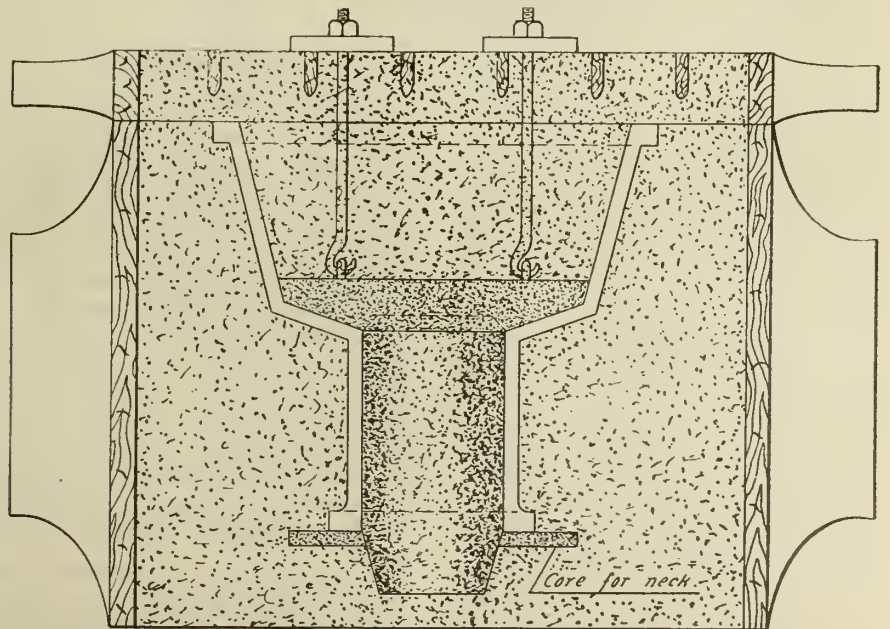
SHOWS BETTER WAY OF MOLDING. NECK CORE IS BEDDED IN AS THE MOLD IS BEING RAMMED UP. AFTER BEING BEDDED IT IS REMOVED, TEMPORARILY, AND THE FLANGE WITHDRAWN. THE CORE IS THEN REPLACED AND WORK PROCEEDED WITH
